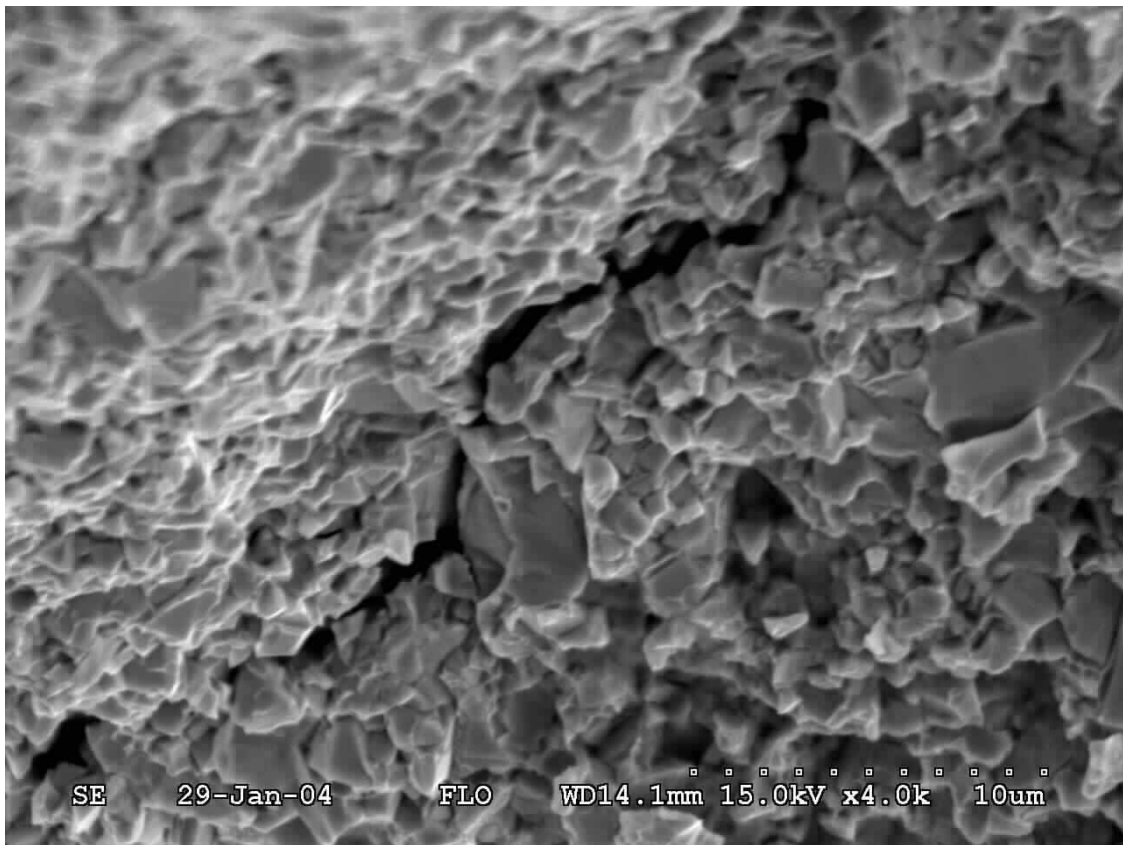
Fracture surface by compression with visible crack. (Kennametal Hertel)
